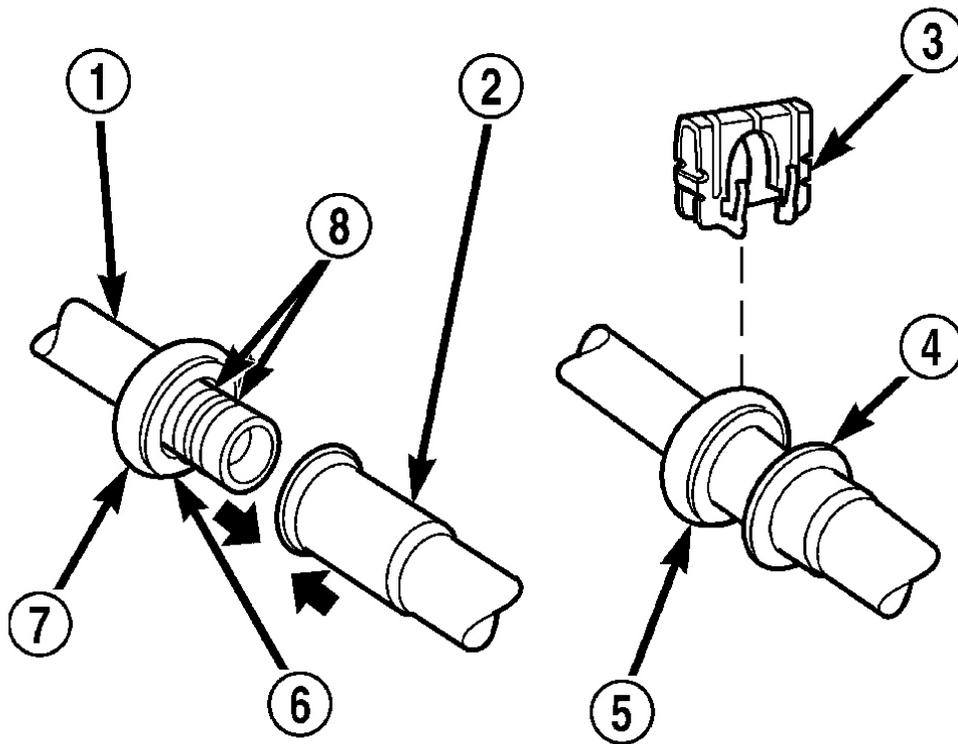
A/C Liquid Line, A/C Condenser Outlet Tube & Spring-Lock Type Refrigerant Line Coupler
